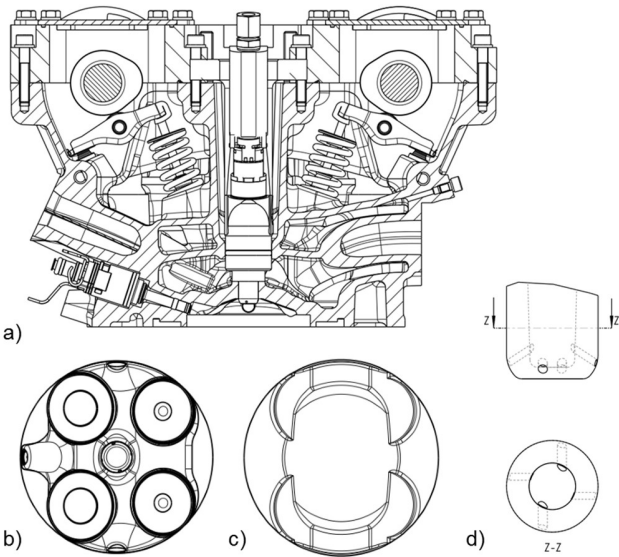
Research engine layout: a) sectional view of cylinder head b) combustion chamber dome c) piston crown for CR=13, d) pre-chamber.
